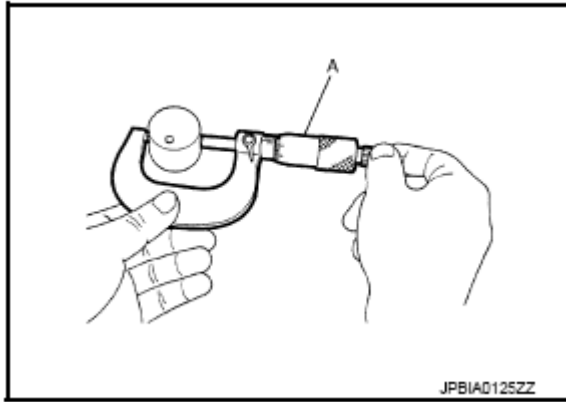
Measuring Outer Diameter Of Valve Lifter Using Micrometer
